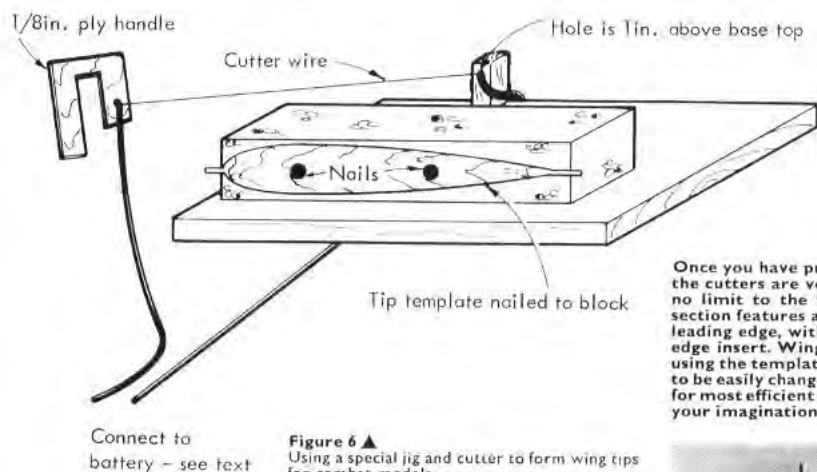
▲ Using a special jig and cutter to form wing tips for combat models.
